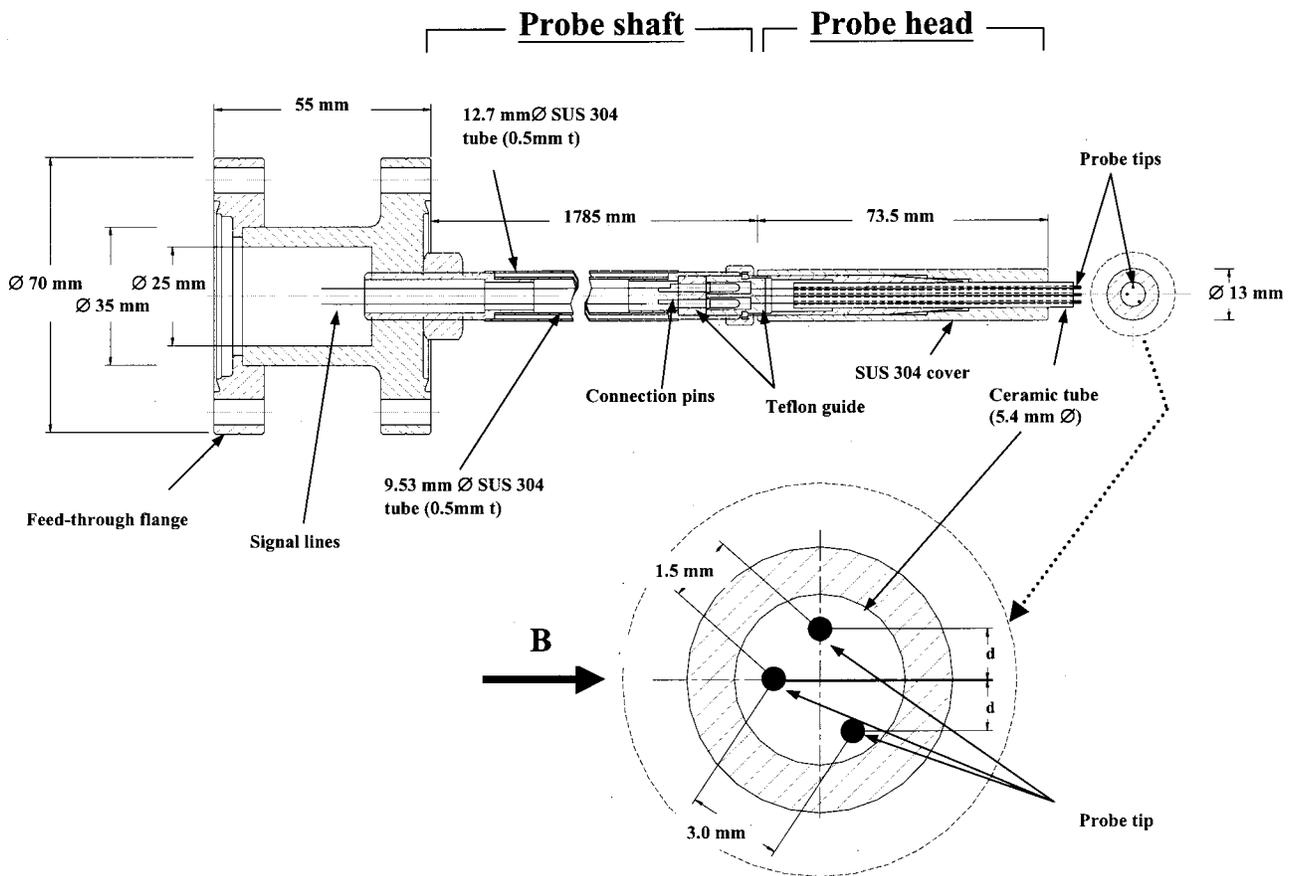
The probe head used as a triple probe and probe shaft of the reciprocating probe assembly. B indicates the applied magnetic field direction.
